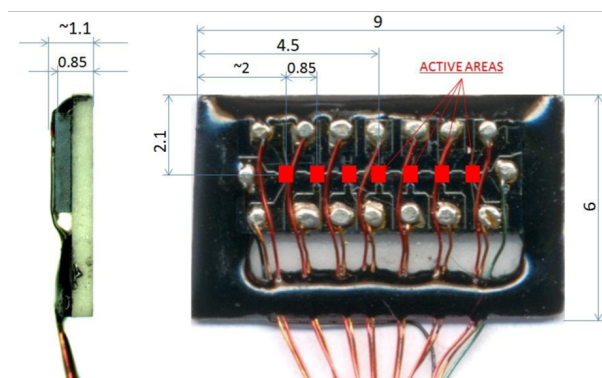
Dimensions of the 7-Hall probe array (M7-TH5) in a unit of mm [12, 51].
